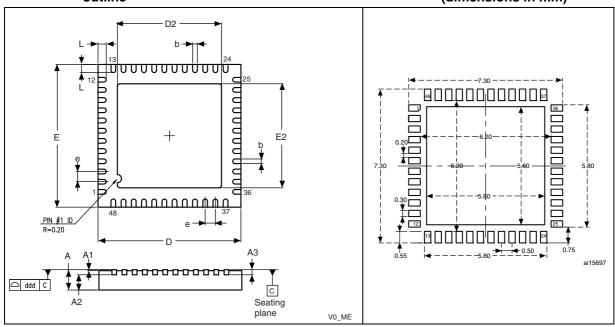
VFQFPN48 7 x 7 mm, 0.5 mm pitch, package Figure 31. Recommended footprint outline⁽¹⁾ (dimensions in mm)⁽¹⁾
